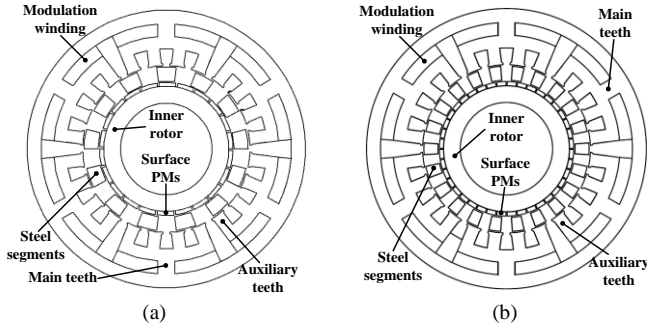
MGM parts of BLDD machines. (a) SPM BLDD machine. (b) Proposed BLDD machine.
